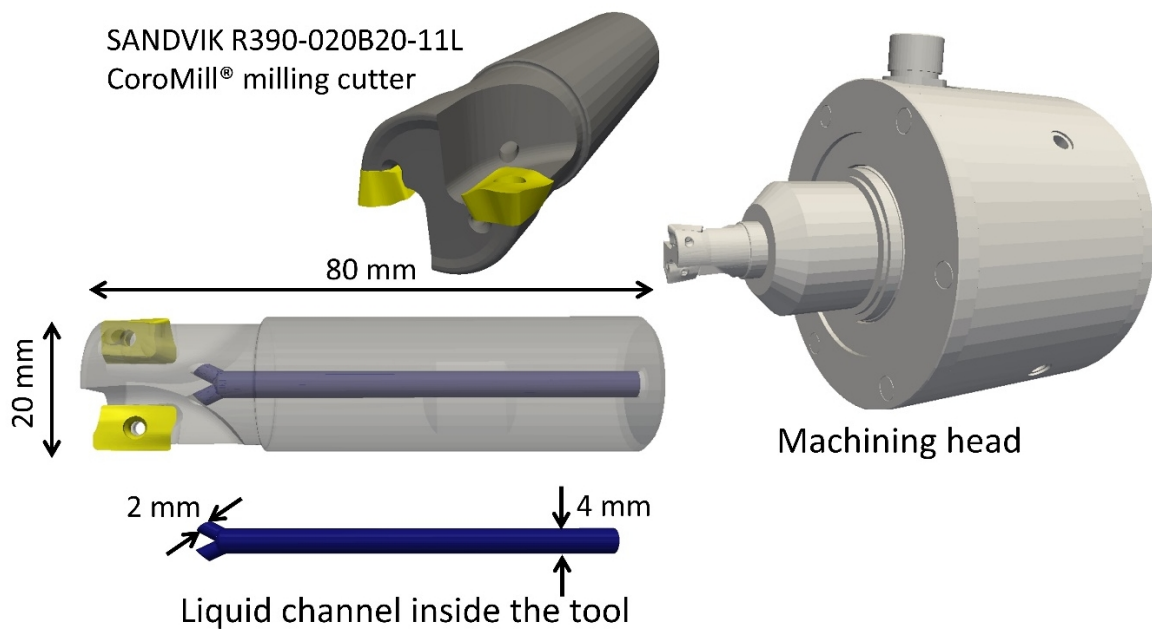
Schematics of cryogenic head, milling tools, and inserts
